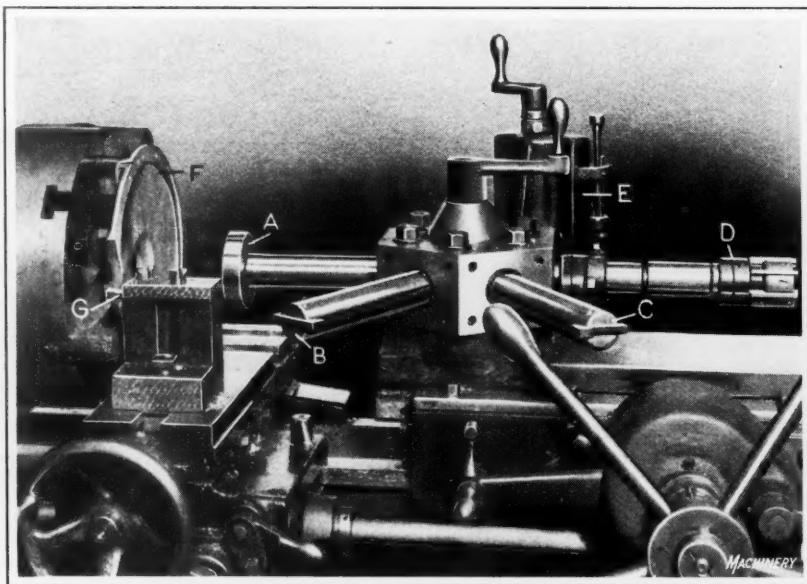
Tool Equipment of a Turret Lathe used for boring, reaming, and facing Rear Crankcase Covers
